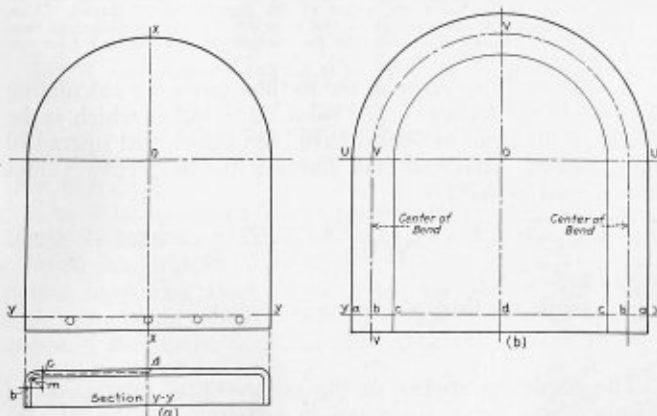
(a)—Method of Finding Center Line of Head. Fig. 5. (b)—Layout of New Sheet
